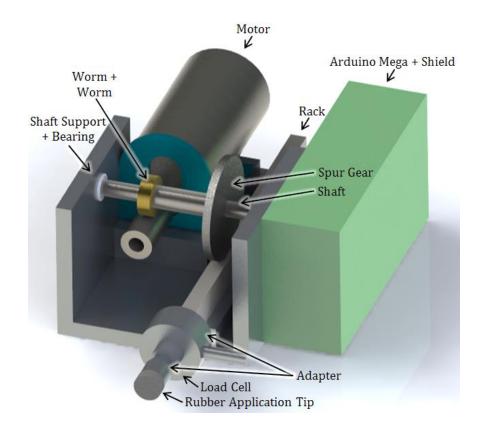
Linear Actuator Gearing Assembly used for AmP-MeD Actuation System
